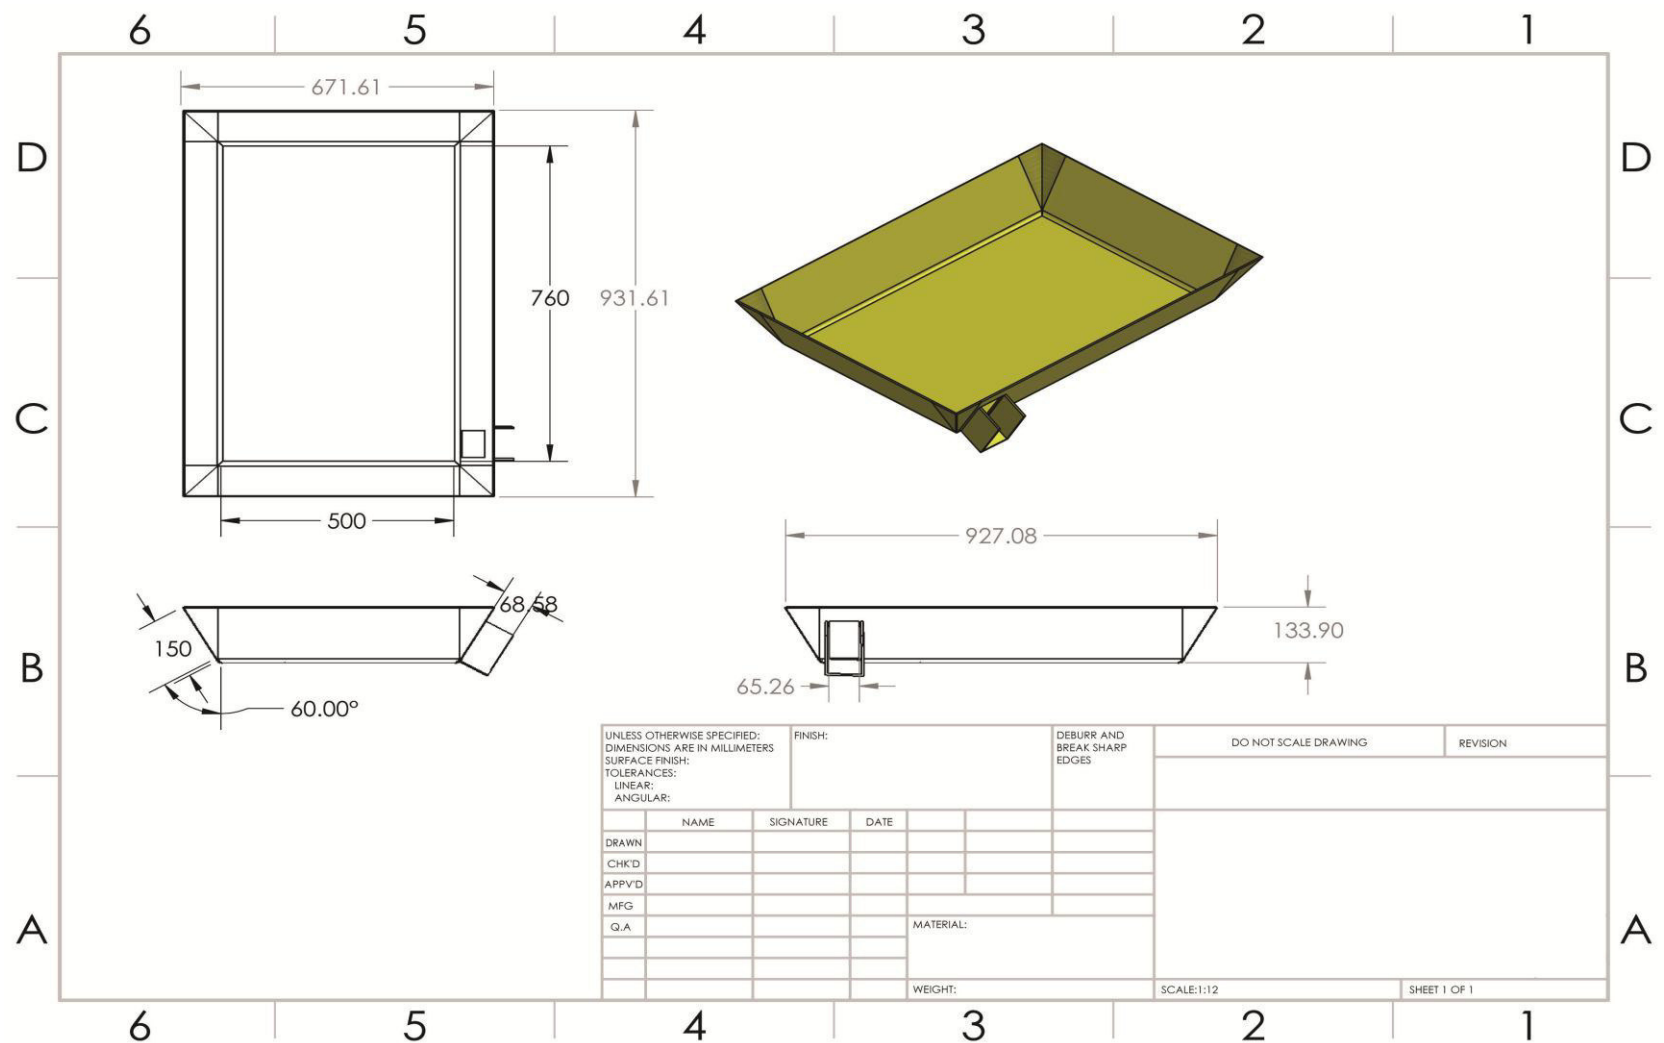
Engineering drawing of the receiving tray-2 (Dimensions are in mm)
